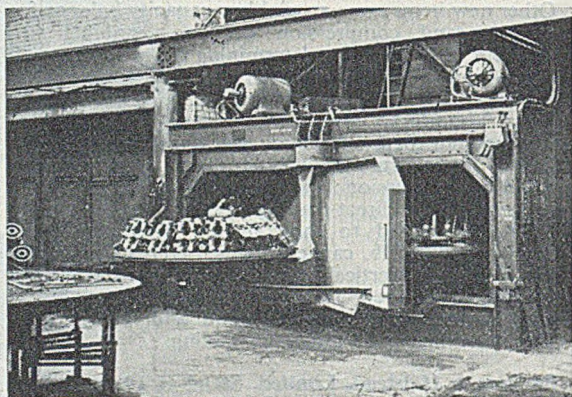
Tilghman's Two-table Shot-blast Machine for Castings up to 1,500 lb.
